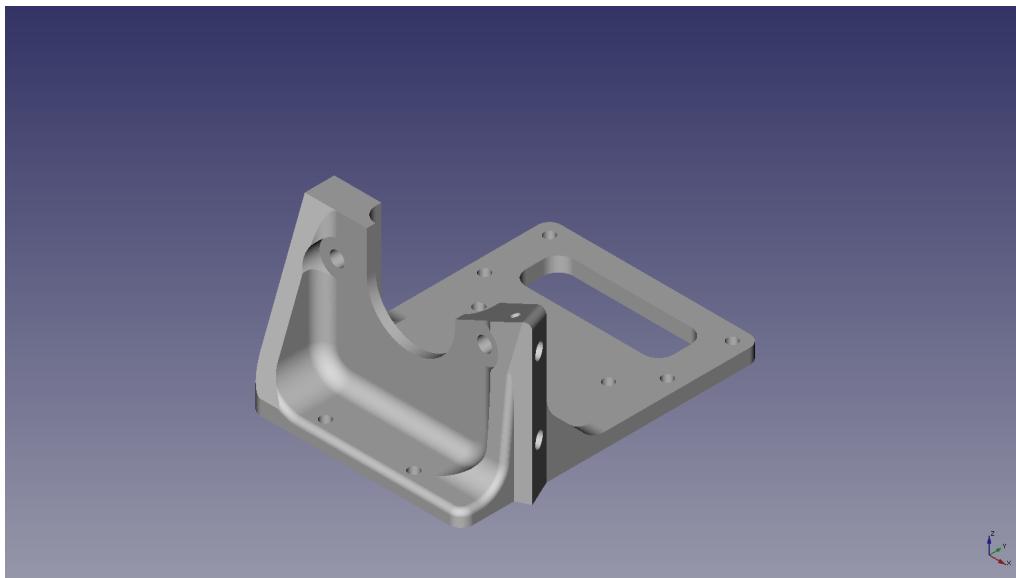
Begonia 3D Printed Extruder Mount Render
